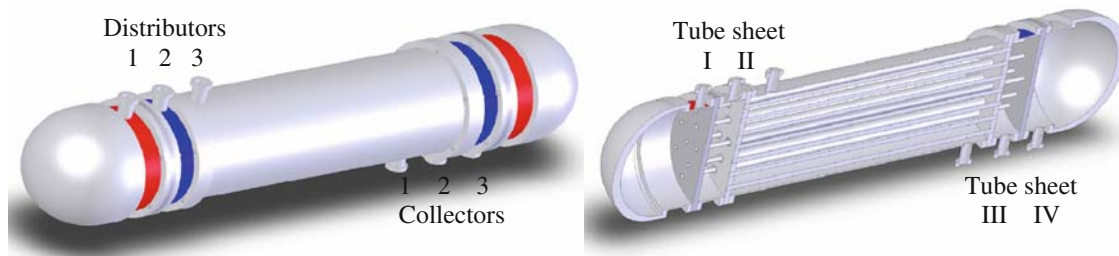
Perspective view and longitudinal section of the shell-and-double concentric-tube
